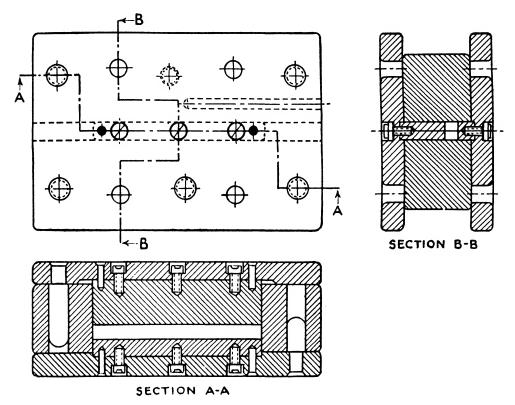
Single-bar, single-cavity positive mold for ½ in. by ½ in. by 5 in. test specimen. Molds for ½ in. x ½ in. x 5 in. or ½ in. x ½ in. x 2½ in. test specimens may be either the single-bar, single-cavity, positive mold shown in Fig. 3.39, or the five-bar, single-cavity mold shown in Fig. 3.40.
